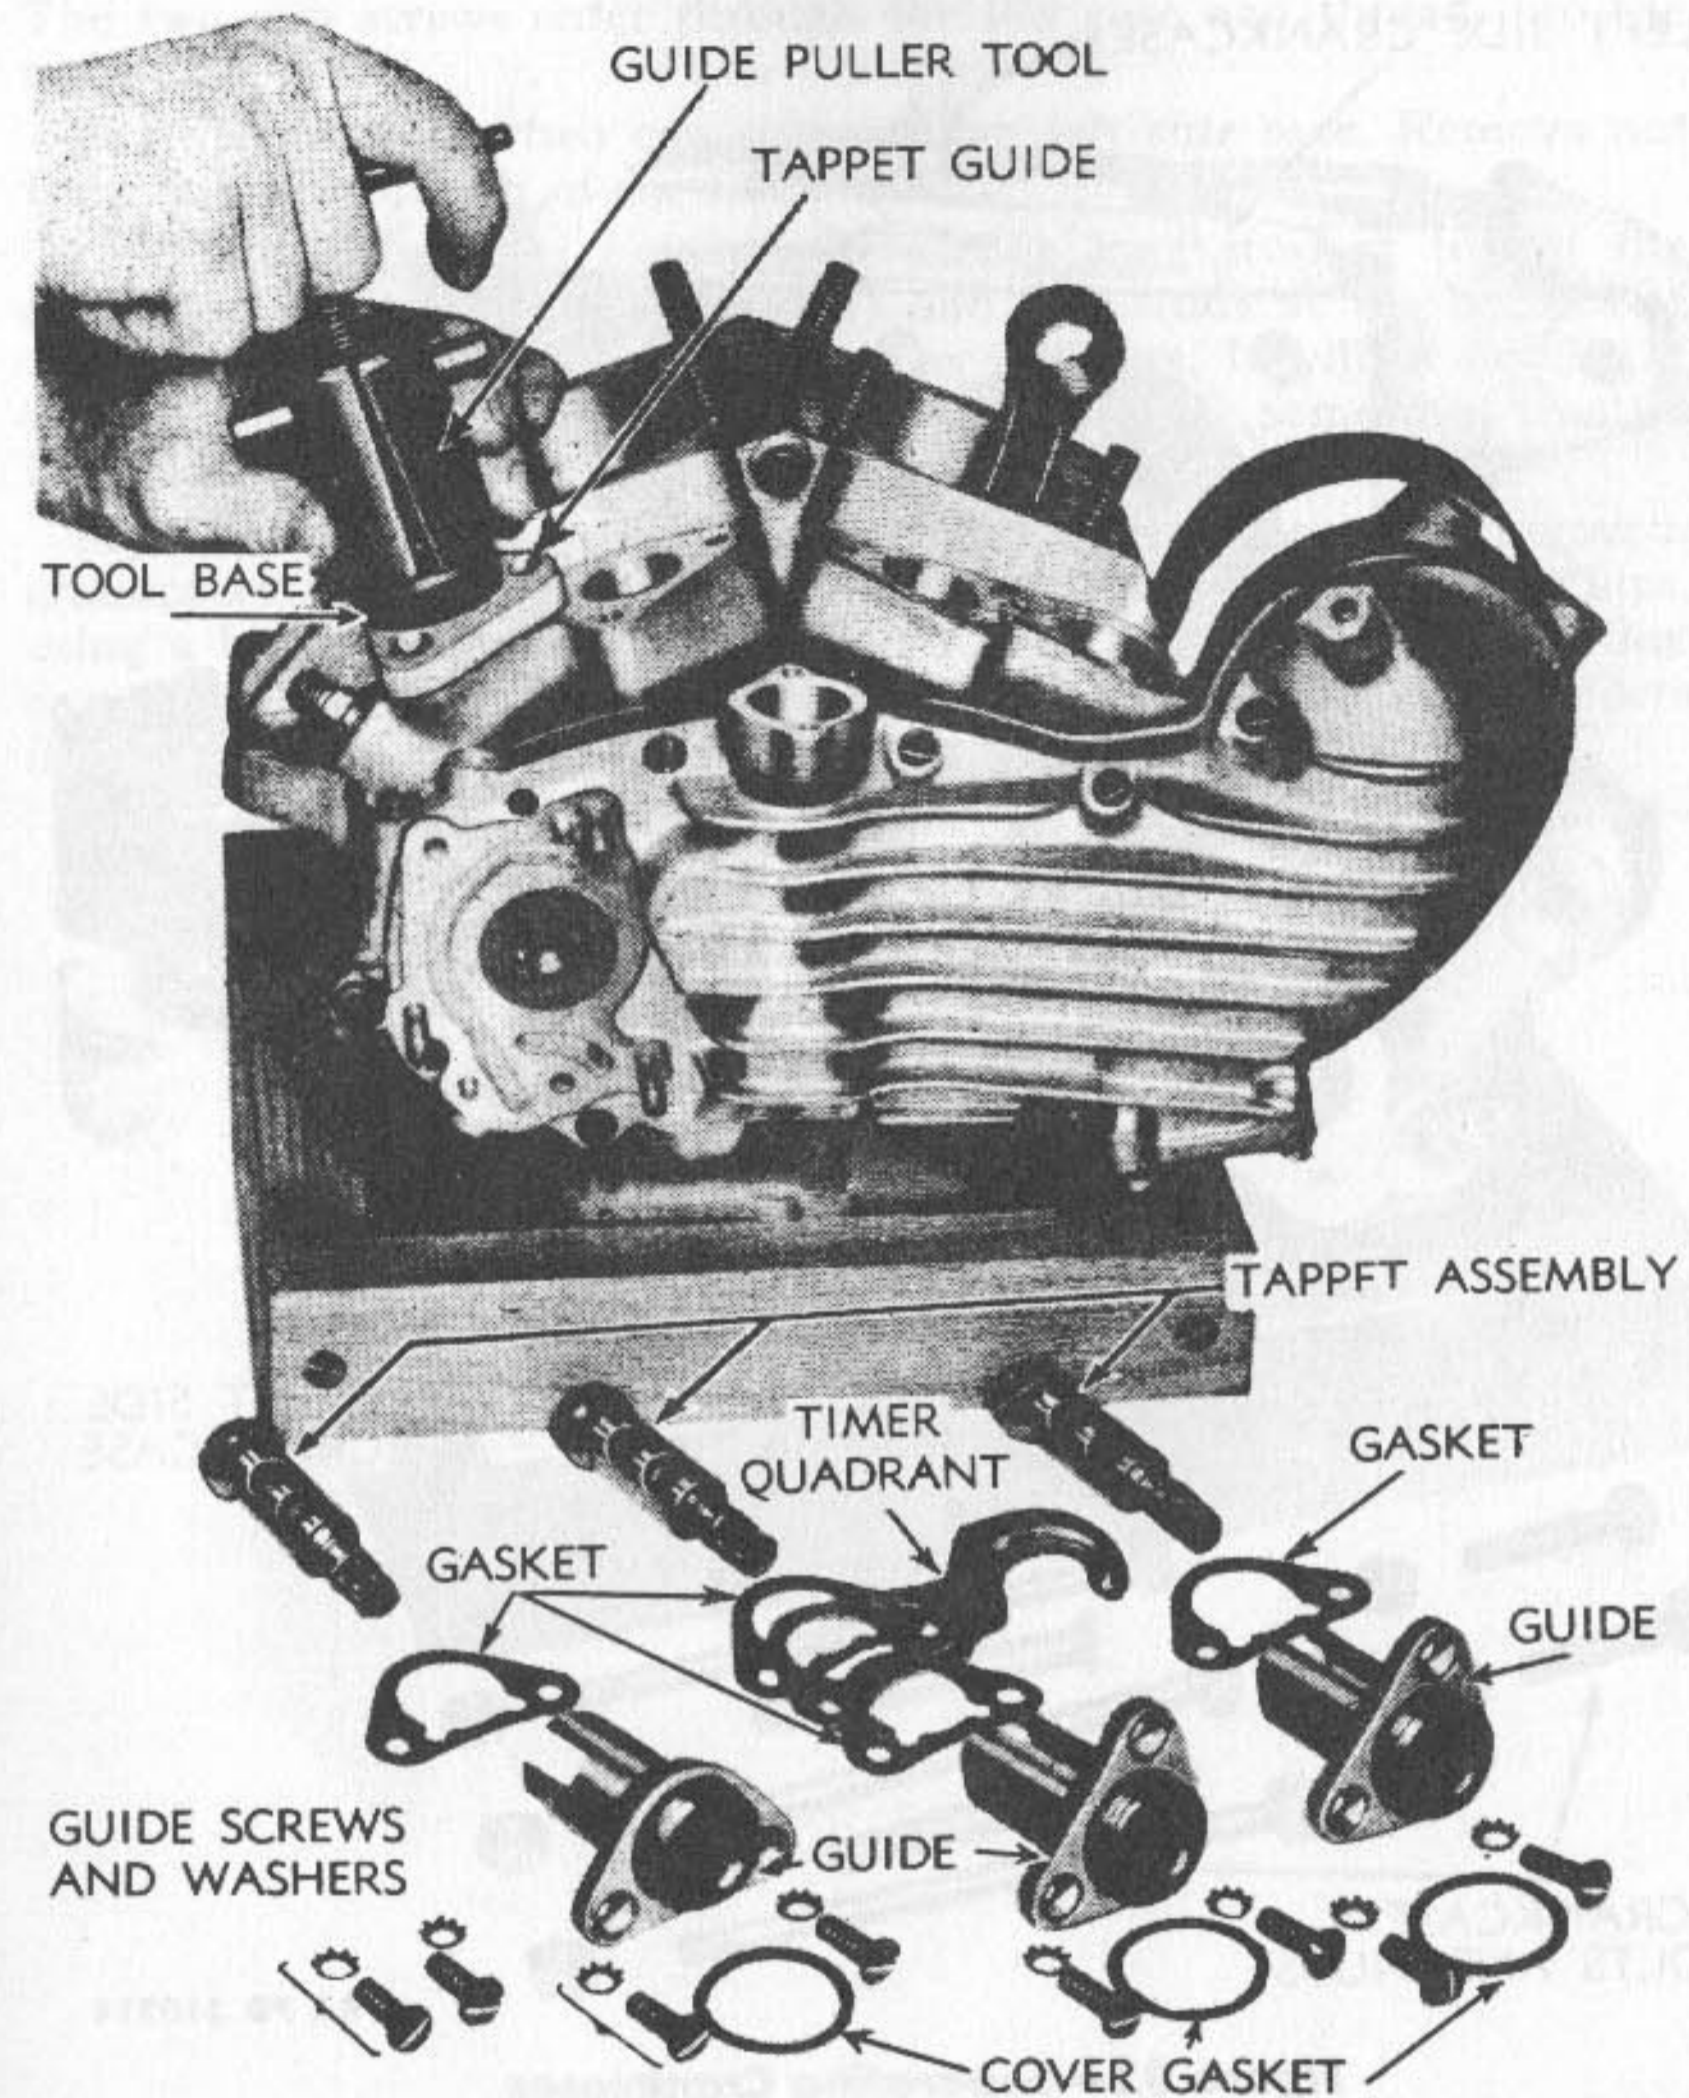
Removing Tappet Guides with Puller (41-P-2956)
